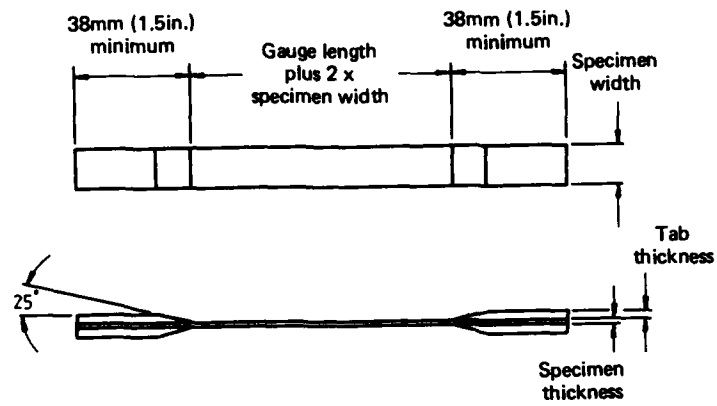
TYPICAL TENSILE TEST SPECIMEN
